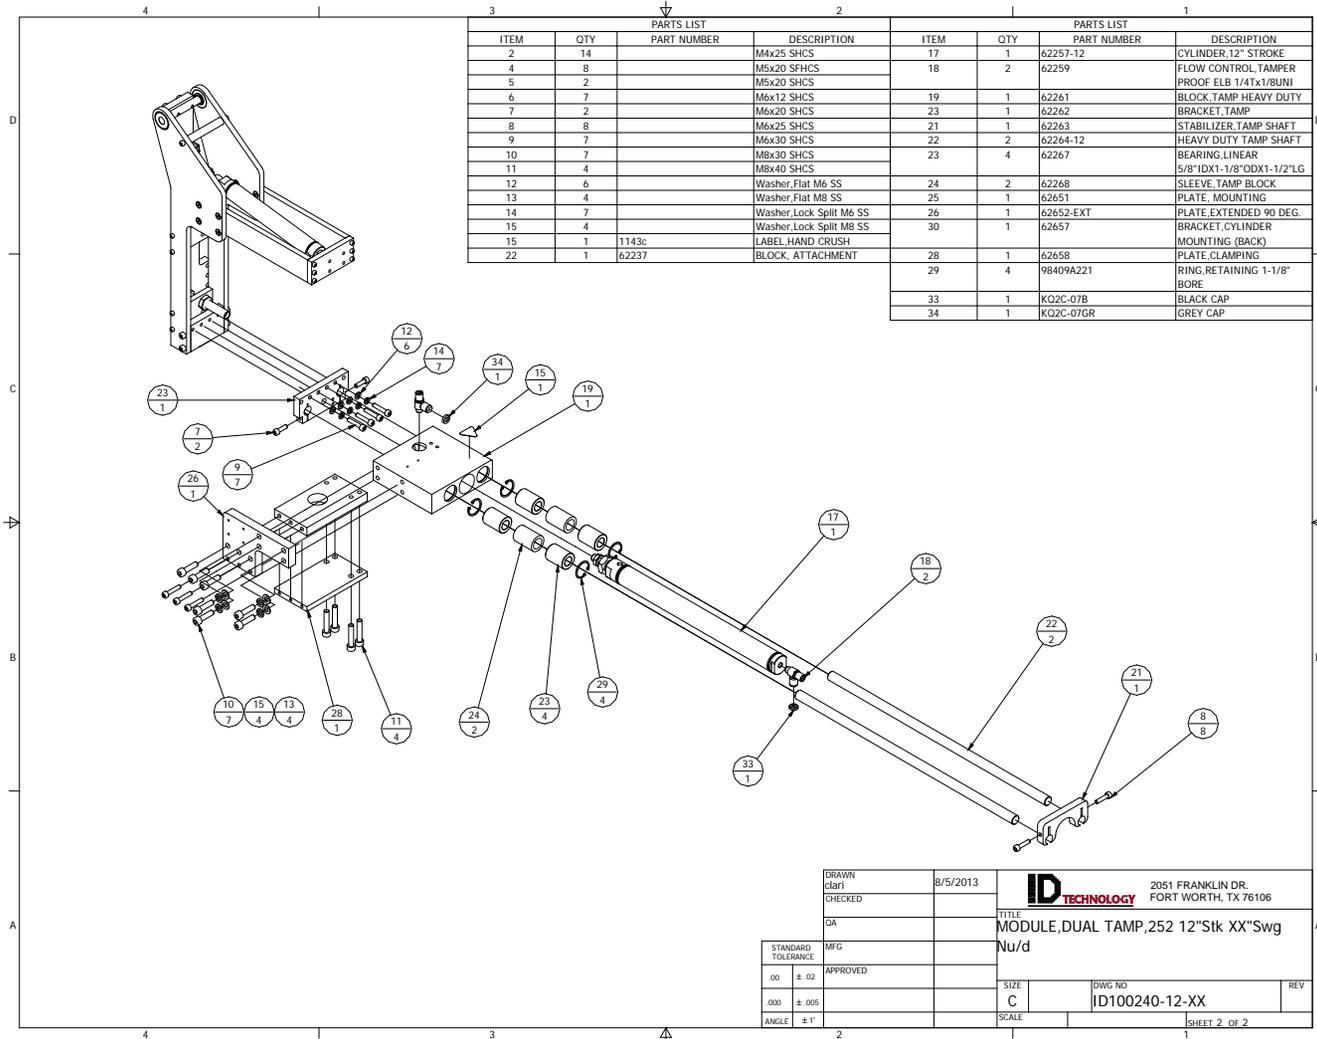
Exploded View, ID100240-12-XX Dual Panel Tamp Assembly NU/ND
